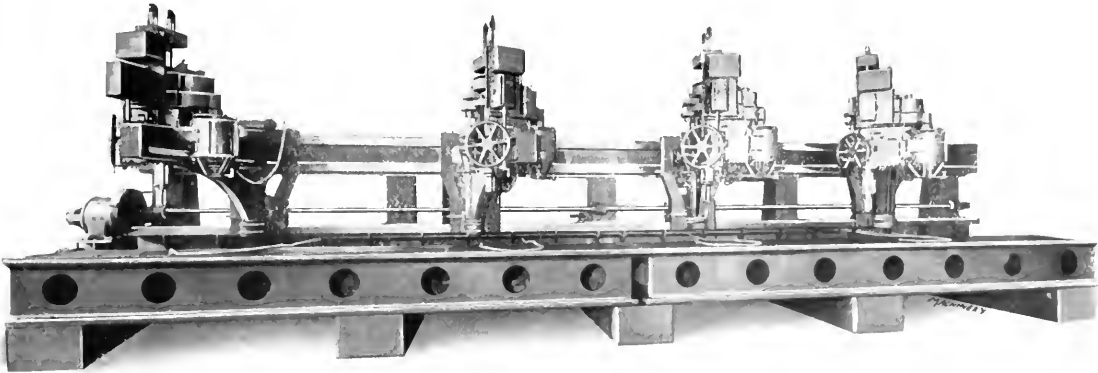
Harrington Multiple Radial Drill for drilling Boiler Plates
